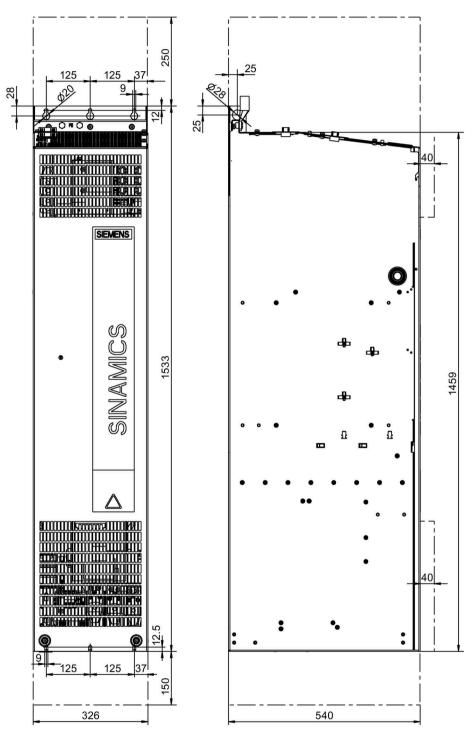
Dimension drawing Motor Module, frame size GX Front view, side view
